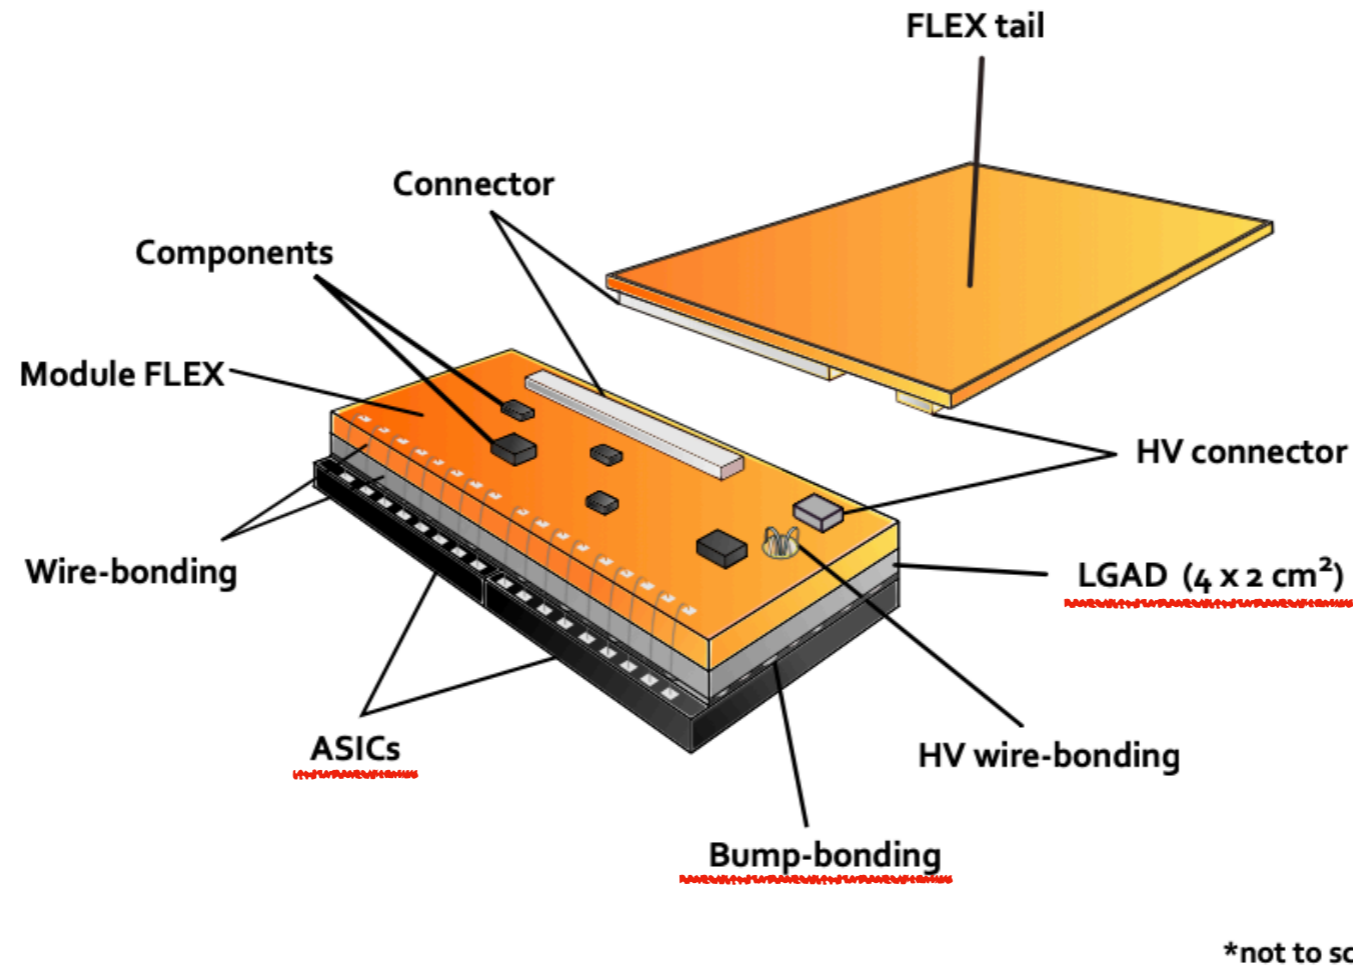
View of an HGTD hybrid module equipped with its read-out flex cable tail. The bare module, glued on the flex cable, is made of a  $4 \times 2 \text{ cm}^2$  sensor with two bump bonded ASICs. The signal lines of the ASIC are wire bonded on one side of the module flex, while the bias voltage of the sensor is provided to the back-side of the sensor through a hole in the module flex.
